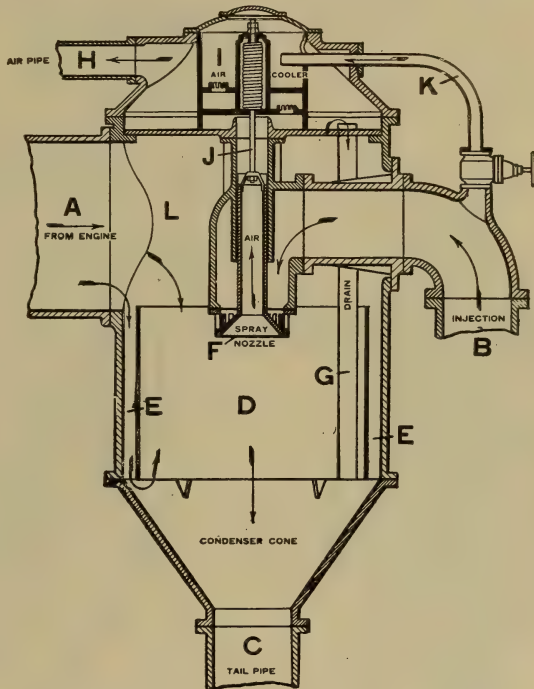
Section through Condensing Chamber, Alberger Barometric Condenser.
